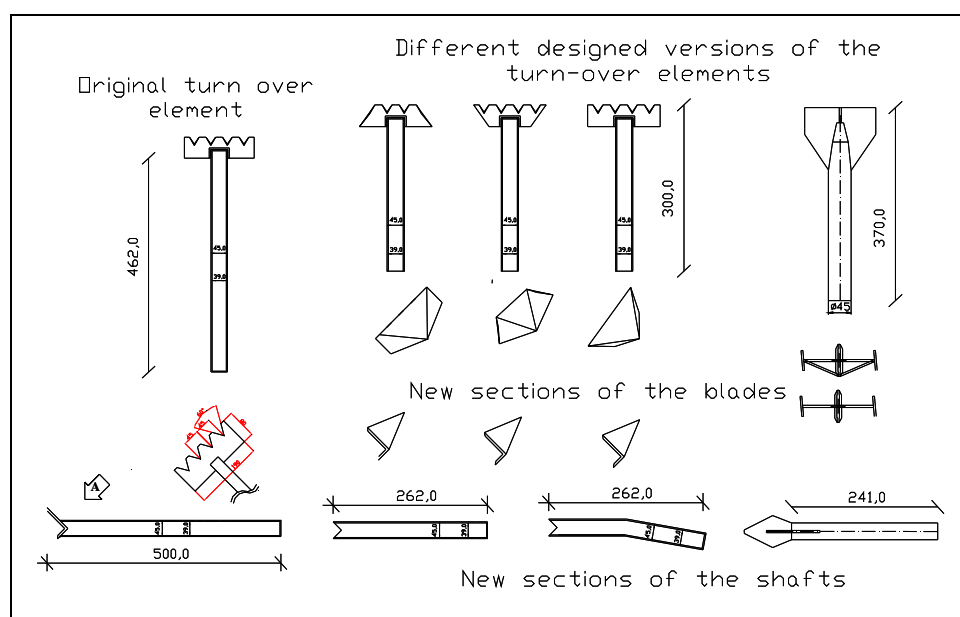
Technical modifications on the prototype of turn-over/aerating machine.
